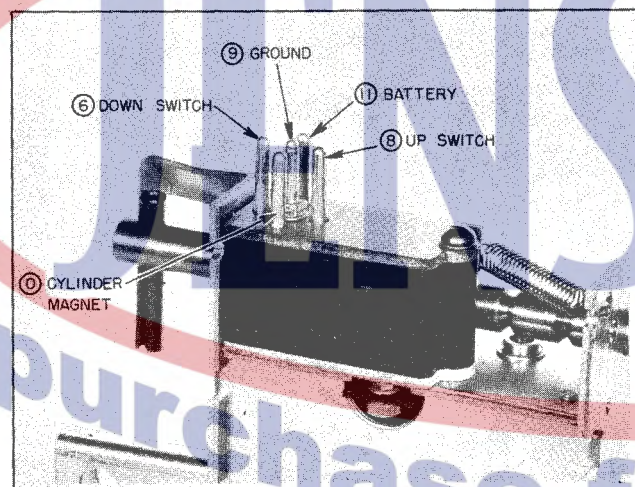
No. 3 Unit Switch Assembly Terminals
